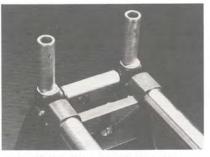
Position the mounting tubes in the Mark V power mount, long end up, with the shoulders of each tube pointing away from the headstock.
